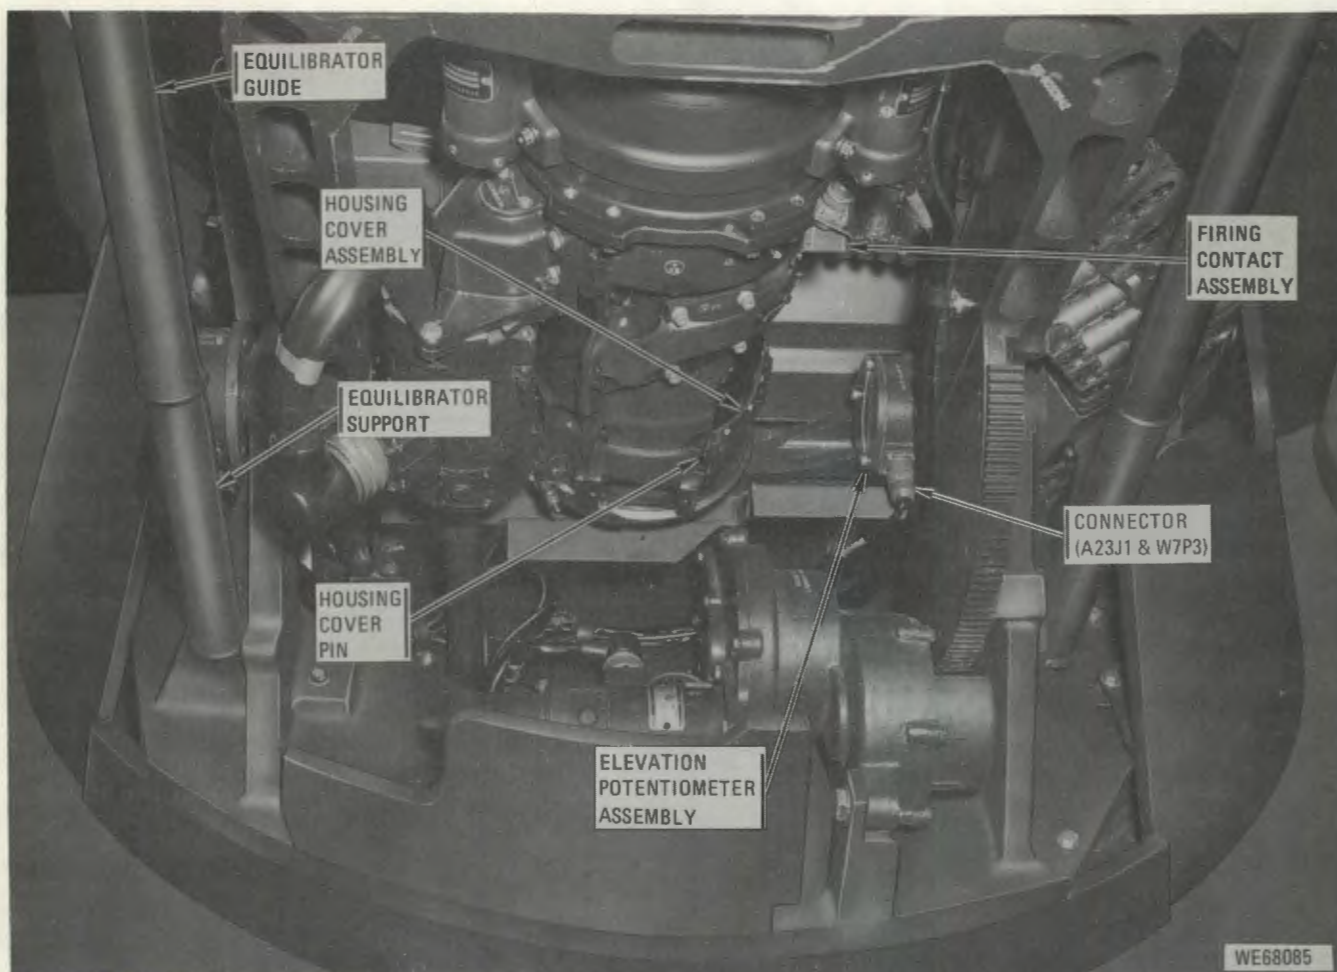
XM168 cannon and XM157 mount, view with cannon in raised position, parts location.
